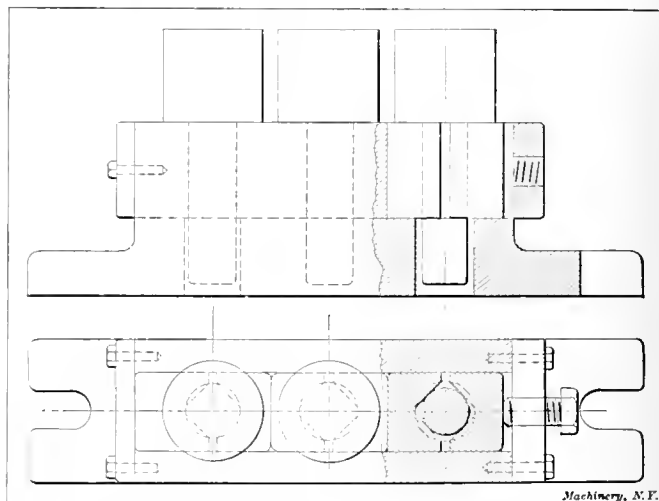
Fixture which will hold a Number of Pieces, Fig. 1, properly, even though Diameters of Locating Parts vary
